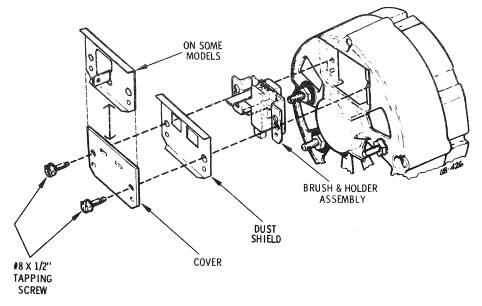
BRUSH ASSEMBLY REMOVAL
